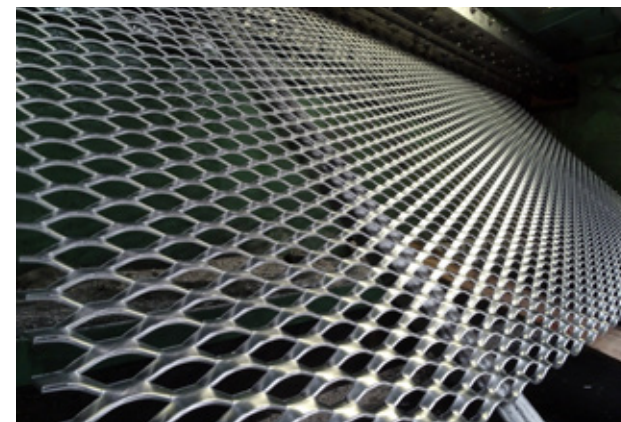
Mill finish expanded aluminium sheet during manufacture by Expanded Metal Company in Hartlepool
